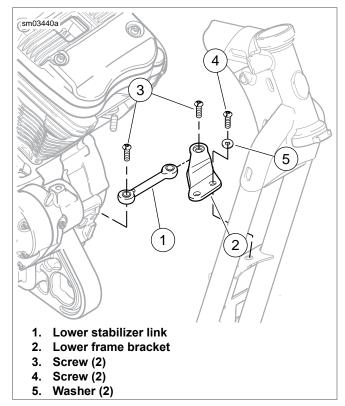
Lower Front Stabilizer Link Assembly (typical)
